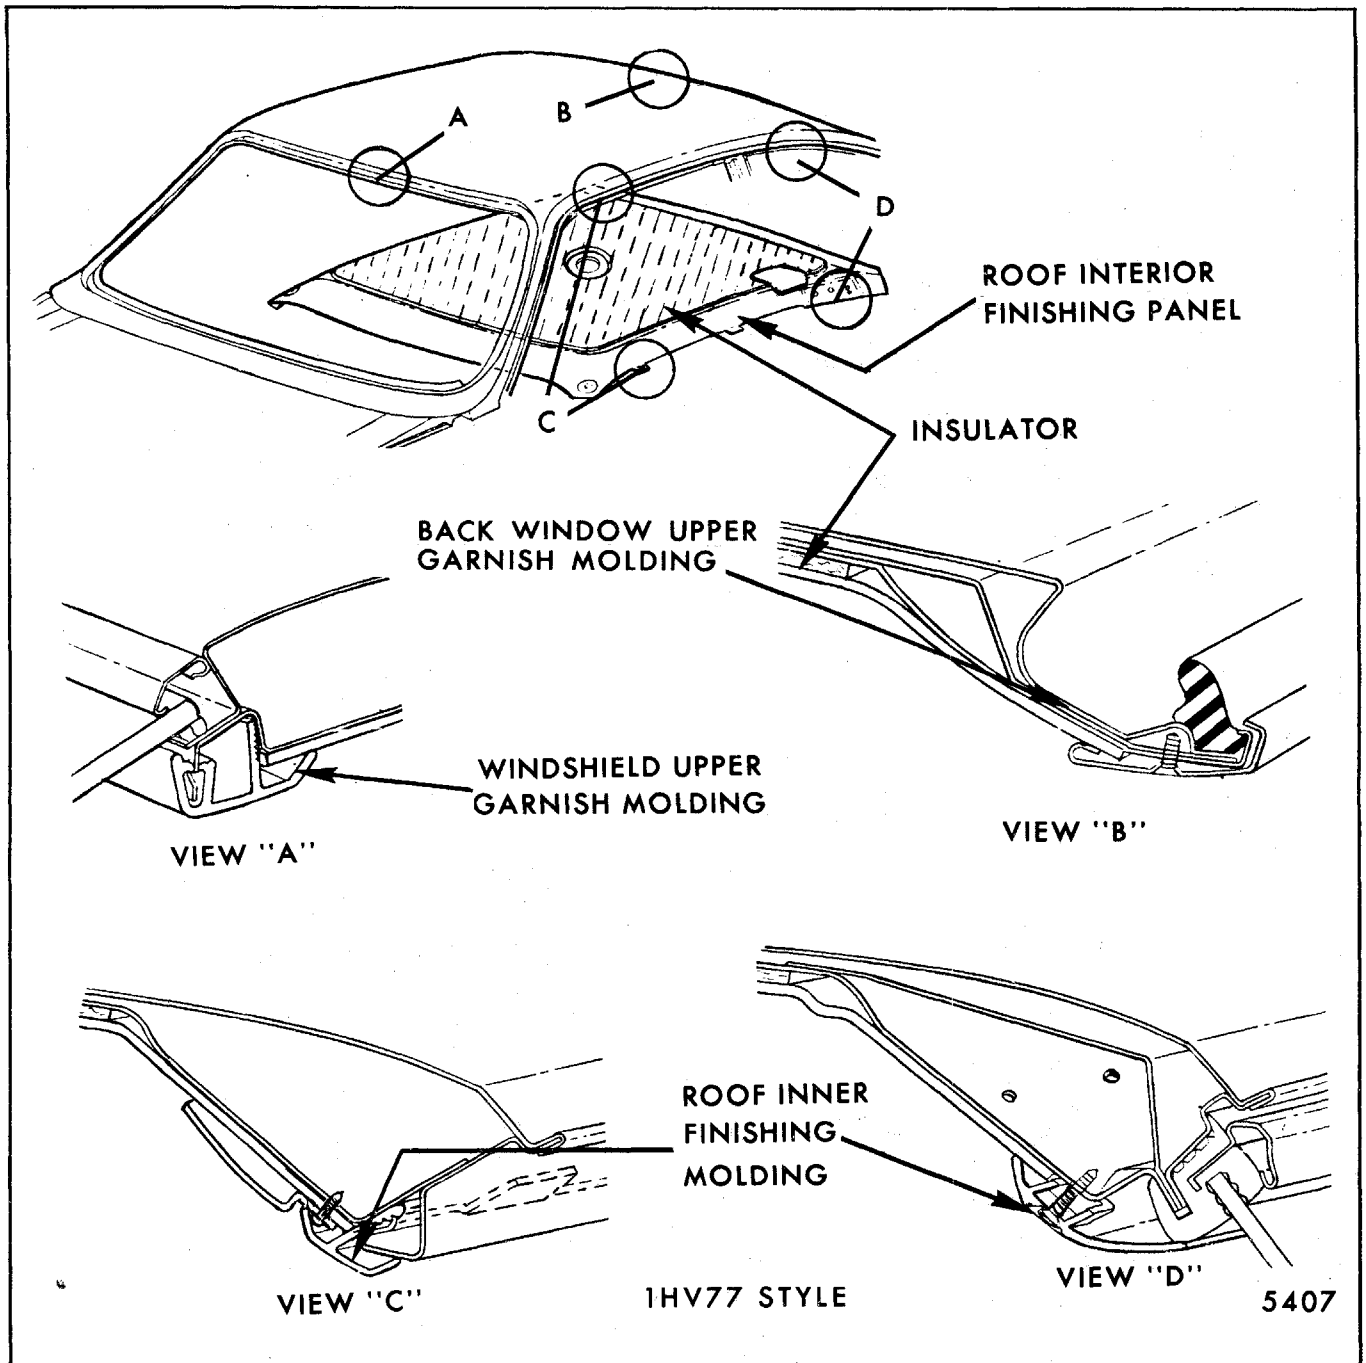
Headlining (Roof Interior Finishing Panel) Assembly - "77" Styles ("07" Styles Similar)
